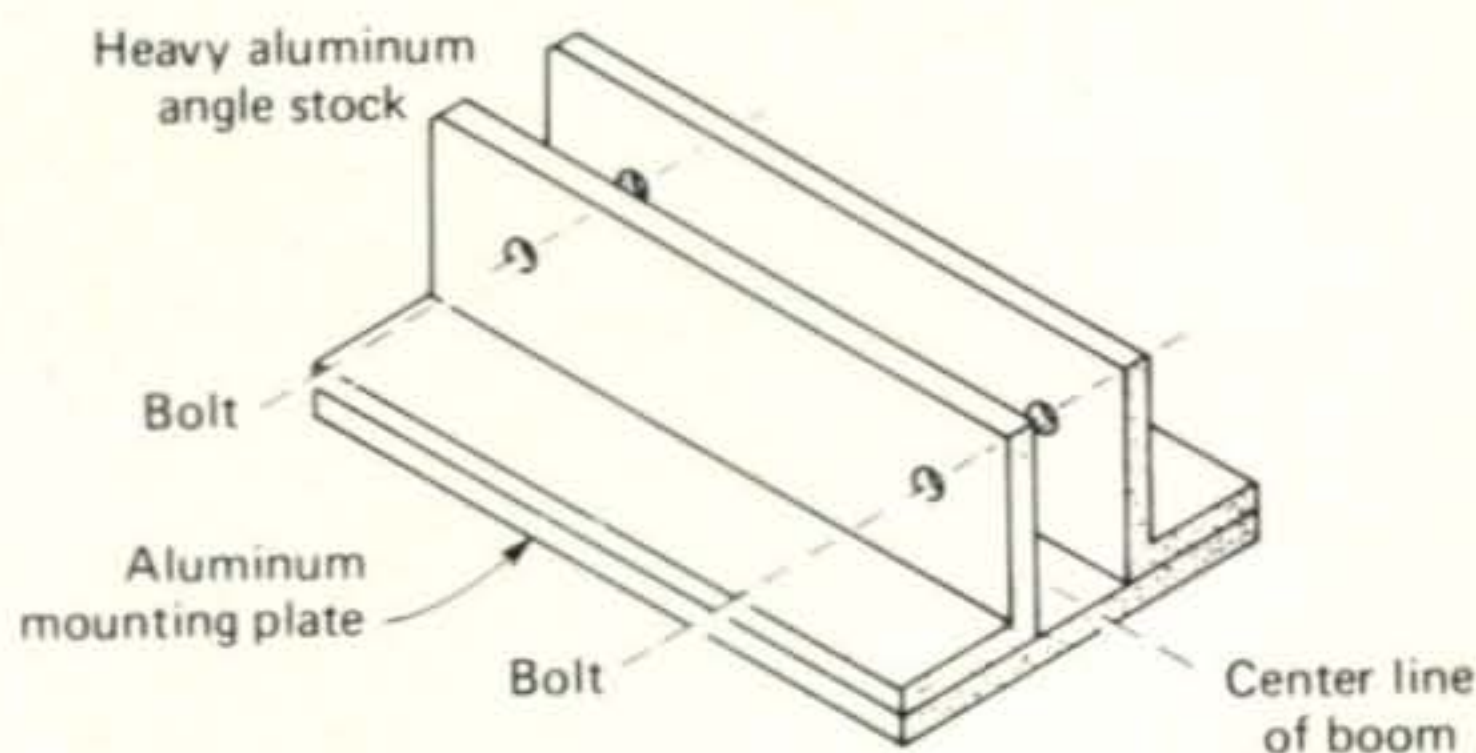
Mounting bracket for beam. An aluminum "cradle" can be assembled out of a flat aluminum sheet and two pieces of heavy aluminum angle stock. The pieces are held together with heavy bolts. The boom fits snugly between the plates and is held in position with two bolts passed through the boom. The aluminum plate can be fastened to the support structure by conventional means. When the bolts are withdrawn, the boom may be slid back and forth in the cradle so that the operator may make adjustments to either the driven element or the director. A safety strap may be passed over the cradle to hold boom in horizontal position.
